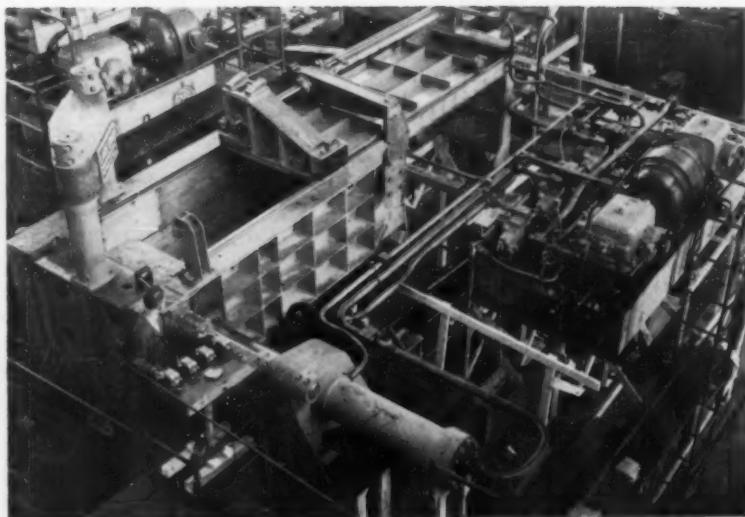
END, matching side and shank of this large block are rough milled in one setup; shank is finished in second setup.
